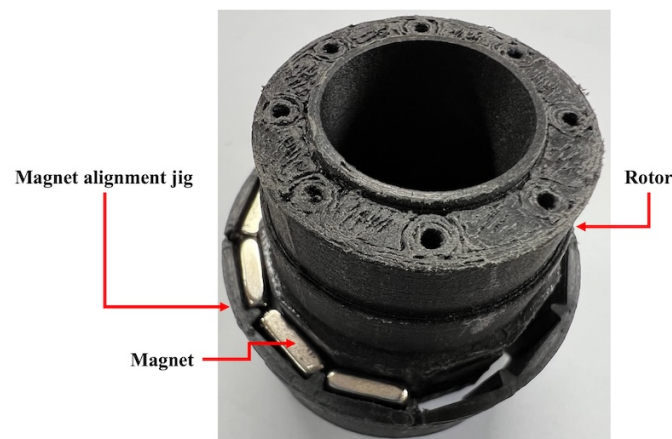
Early design of the rotor, showing the need for a magnet alignment jig to ensure precise magnet placement.
